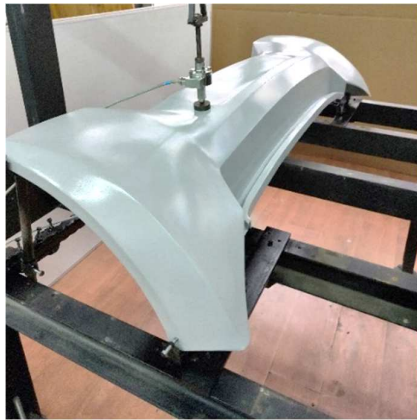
Rear bumper with lateral force application and cylindrical contact surface attachment
